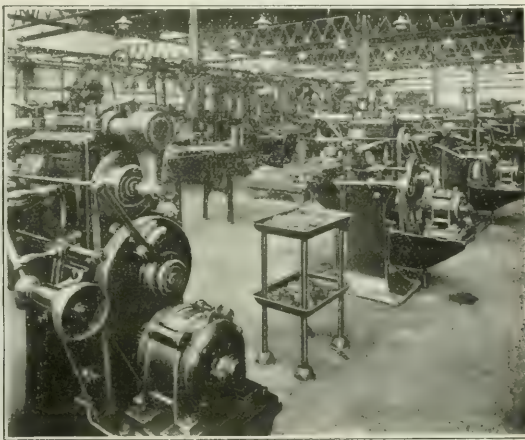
MILLING MACHINES DRIVEN BY GEARED MOTORS.
